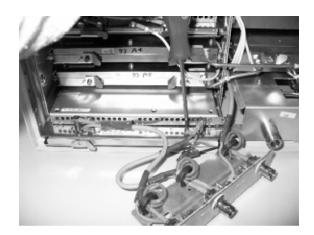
Install the A2 board back in the slot and put connectors back on the board
